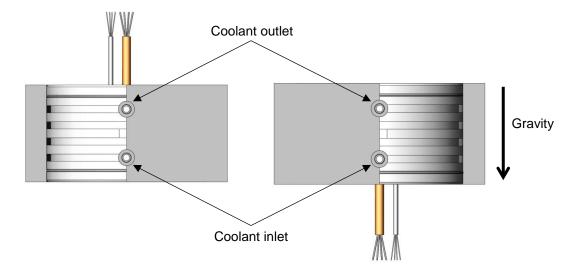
Coolant inlet / outlet position when mounted horizontally
